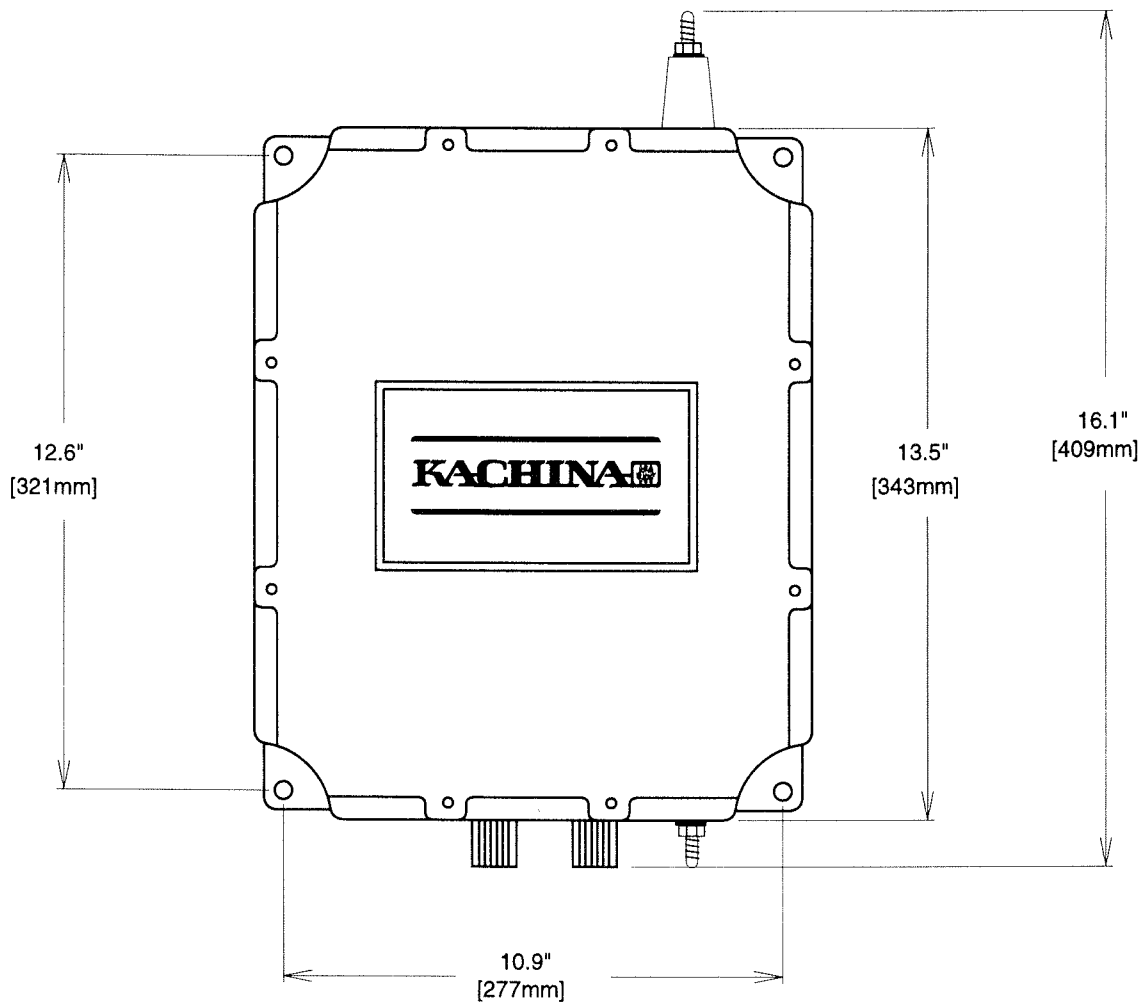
OUTLINE AND MOUNTING DIMENSIONS
